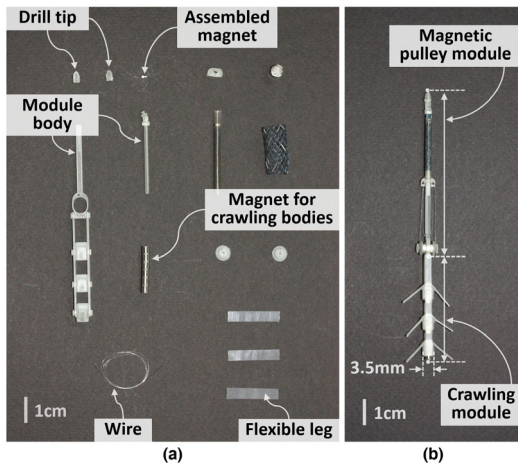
(a) Prototyped parts, magnets, flexible legs, and wire. (b) Assembled CMR.
